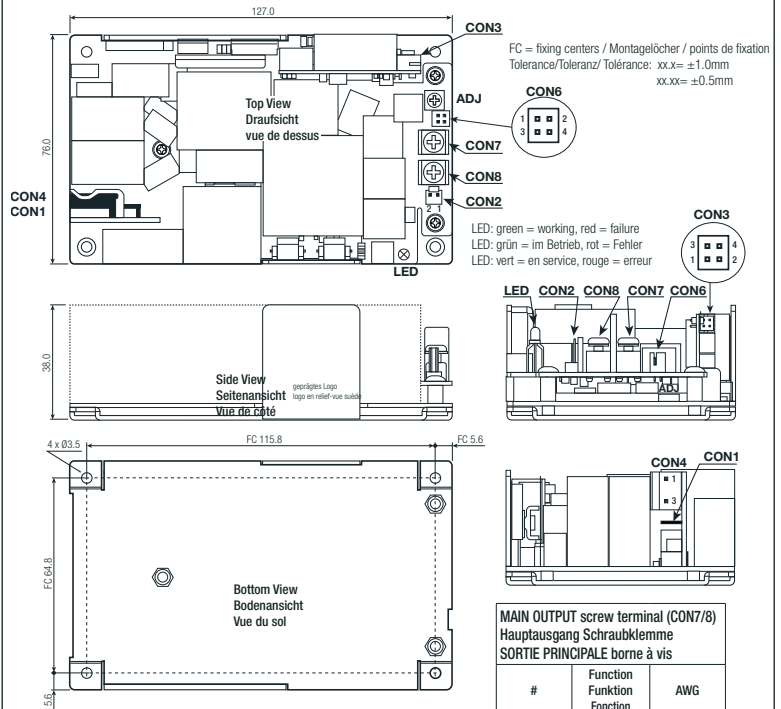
Mechanical Dimension / Mechanische Dimensionen / Dimensions mécaniques
